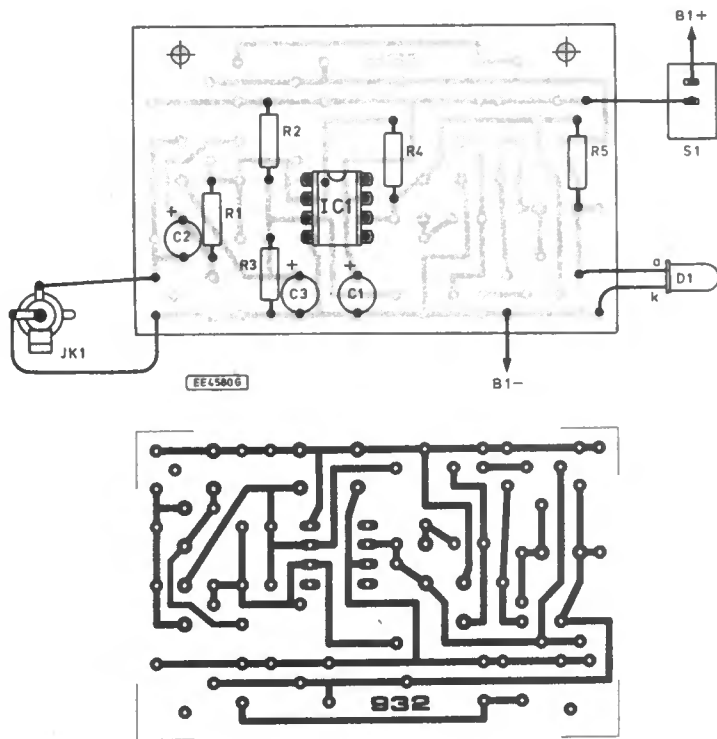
P.C.B. component layout, full size foil master pattern and wiring for the Light Beam Communicator Transmitter.
